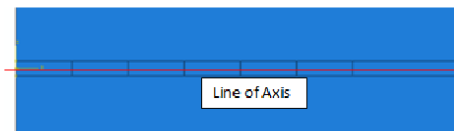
Weld line of a 2D plate model. Seven stage welding was defined for the model to complete the welding of the plate.
